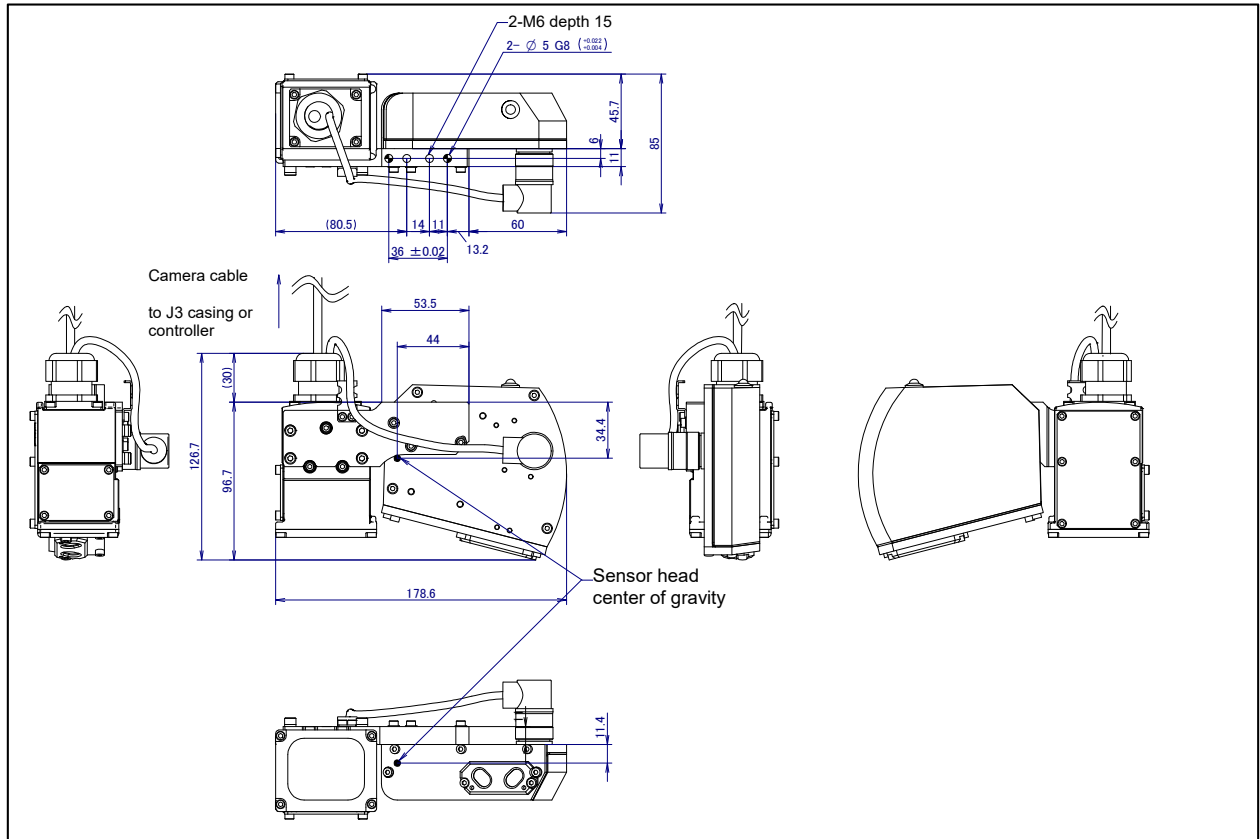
(a) External dimensions of the 3D Laser Vision Sensor Head (stand off 400mm)
